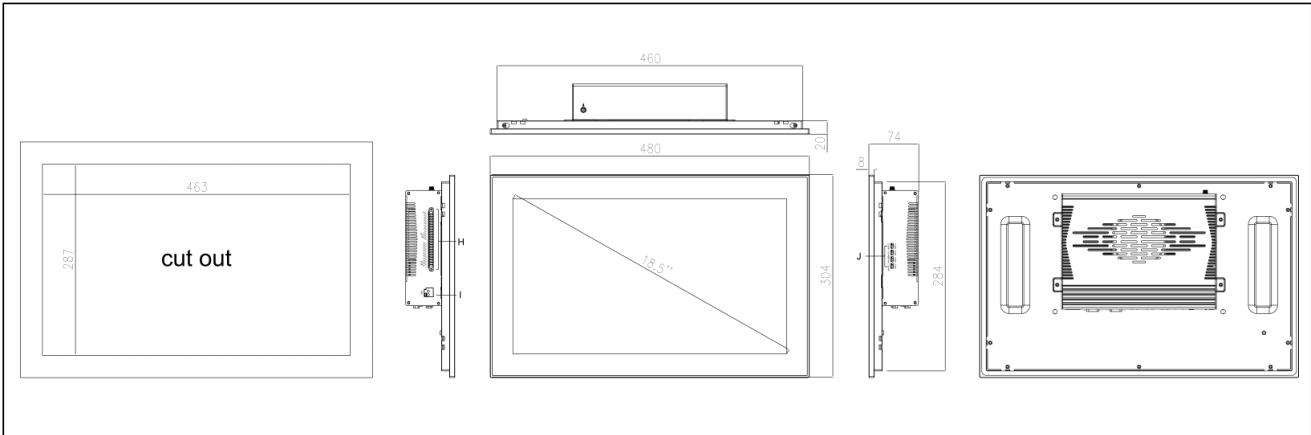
9 TPC6000-C1854-LH Dimension
